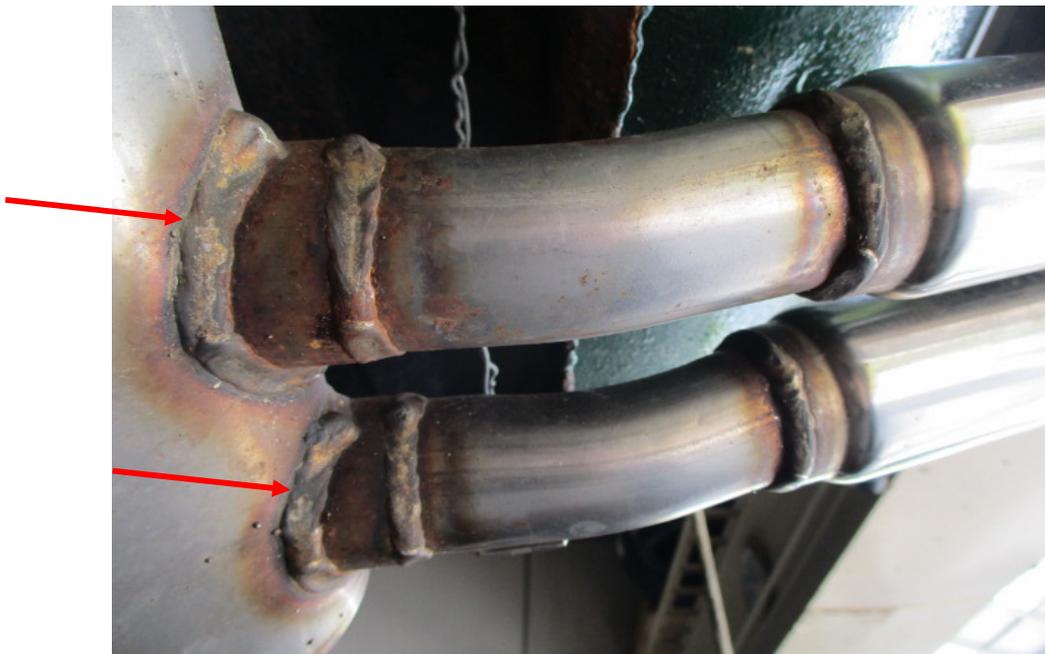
shows a close up view of the welding marks (arrowed) that were seen surrounding the area where the exhaust end pipes join the rear exhaust muffler.
